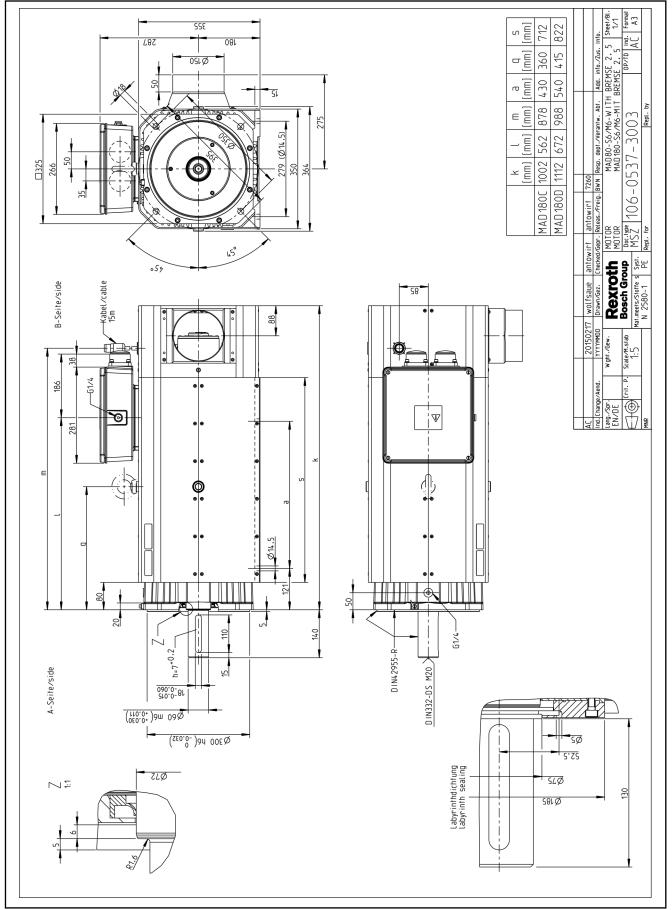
MAD180 with encoder M6/S6, brake 2/5
